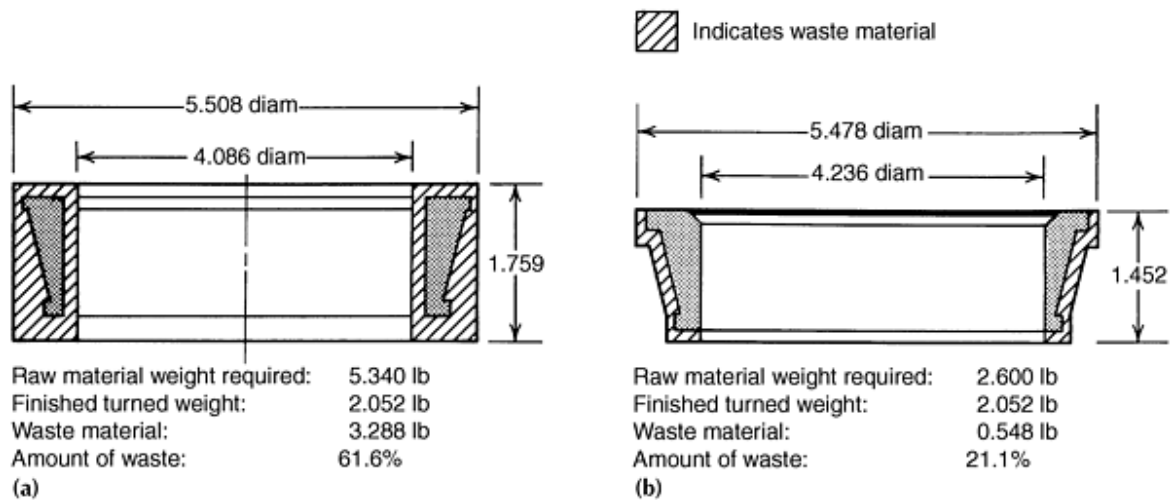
Raw material utilization in the production of a tapered roller bearing race. (a) Produced from hot rolled tube stock. (b) Powder forged from preform. Source: Ref 100
